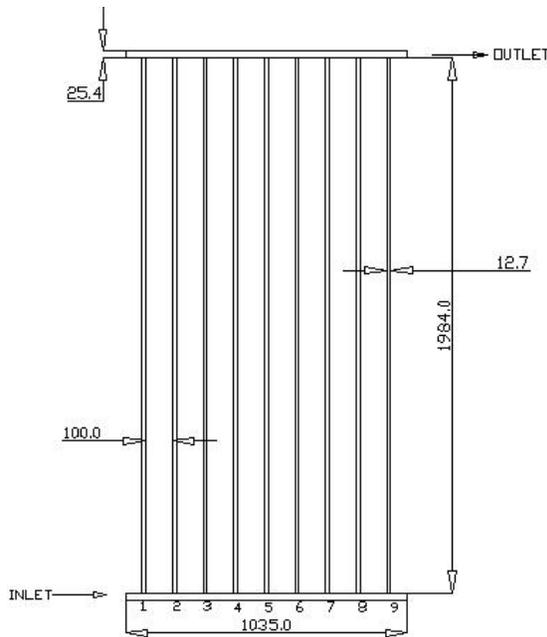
Sectional view of 9 riser tubes flat plate collector.
